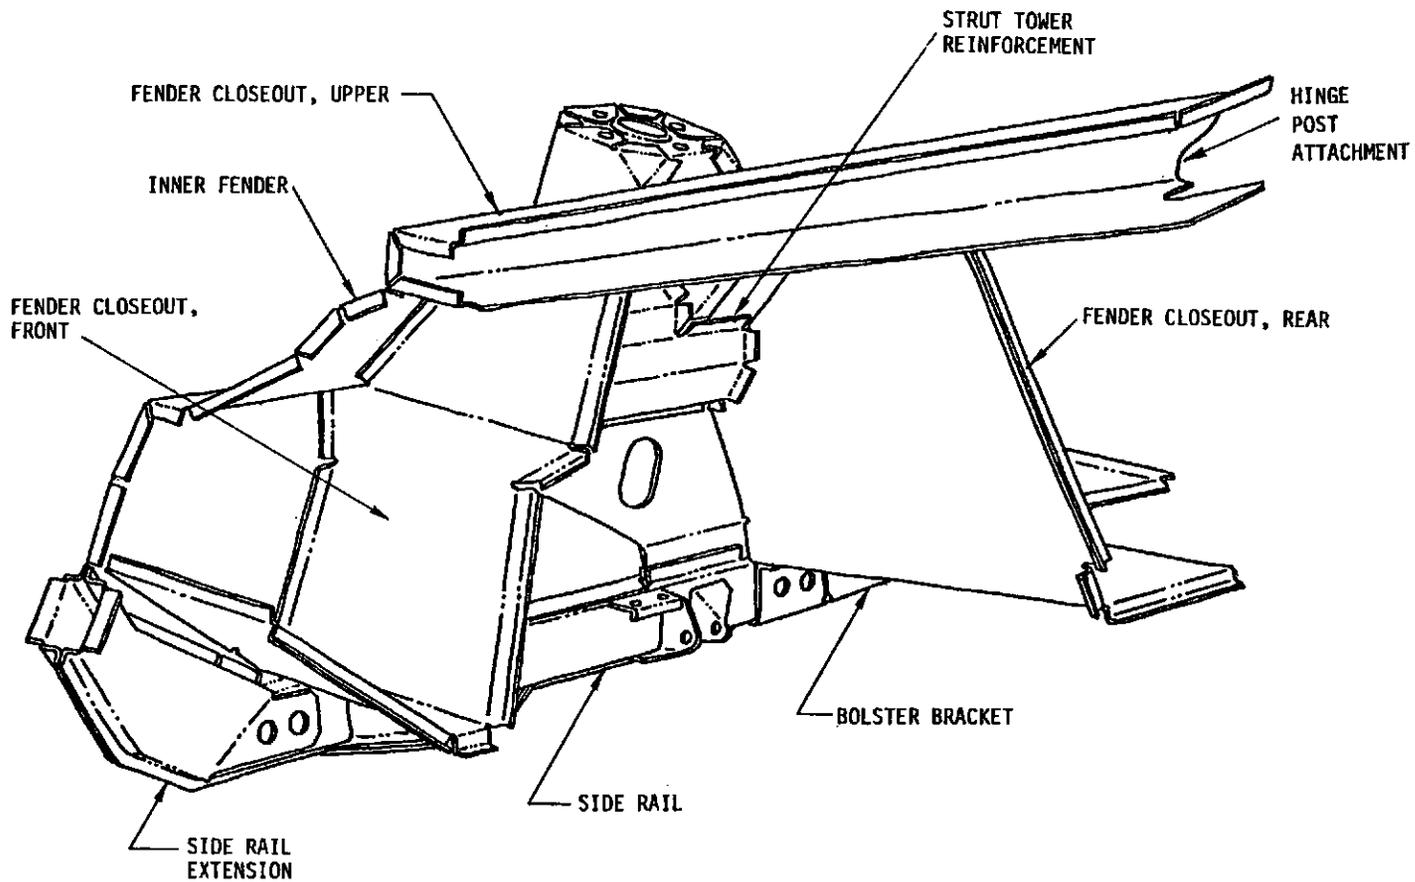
LEFT FRONT INNER FENDER WELDMENT
